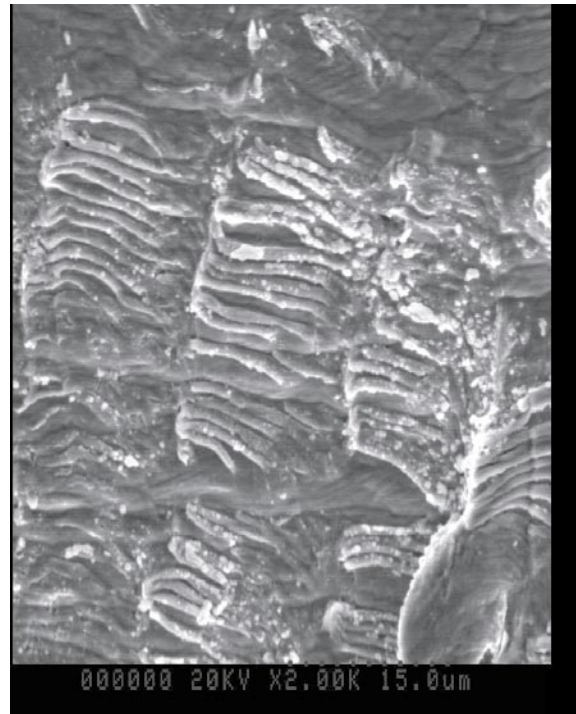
Fracture surface in the SCC zone of a CT specimen (continued on the next page).
